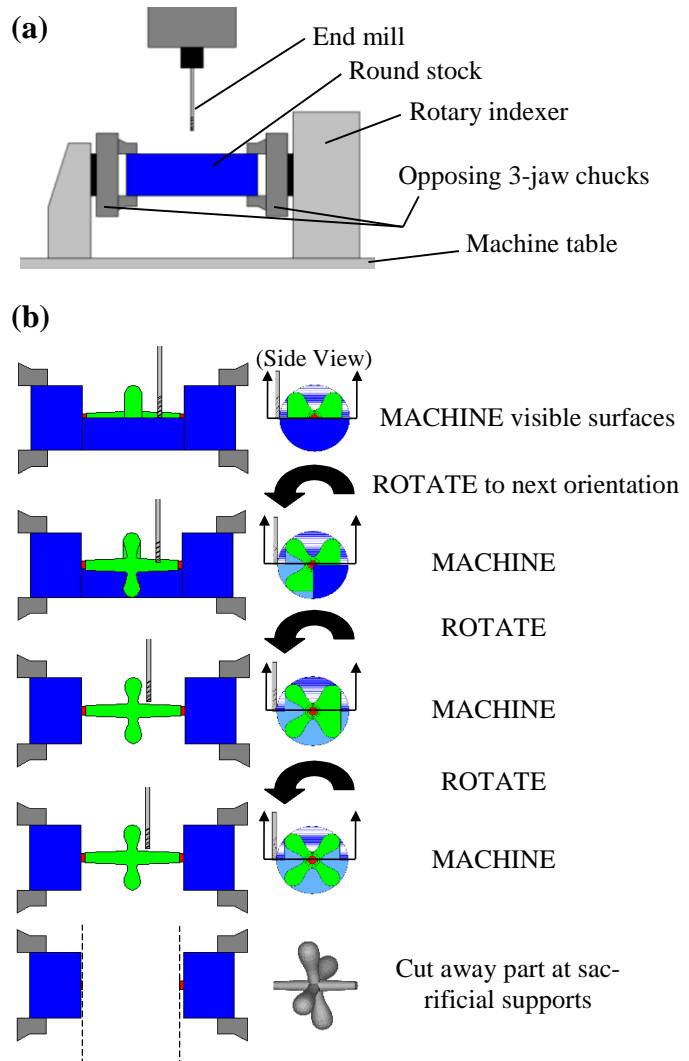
CNC-RP rapid machining (a) set up and (b) processing steps for machining a toy jack [31].
